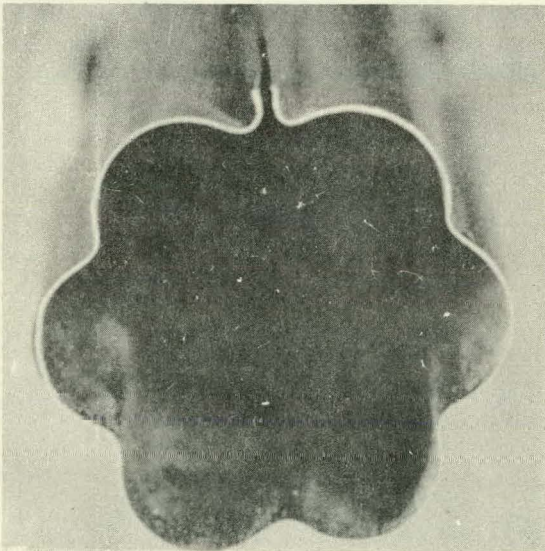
SCALLOPED LINER PRIOR TO WELDING.
